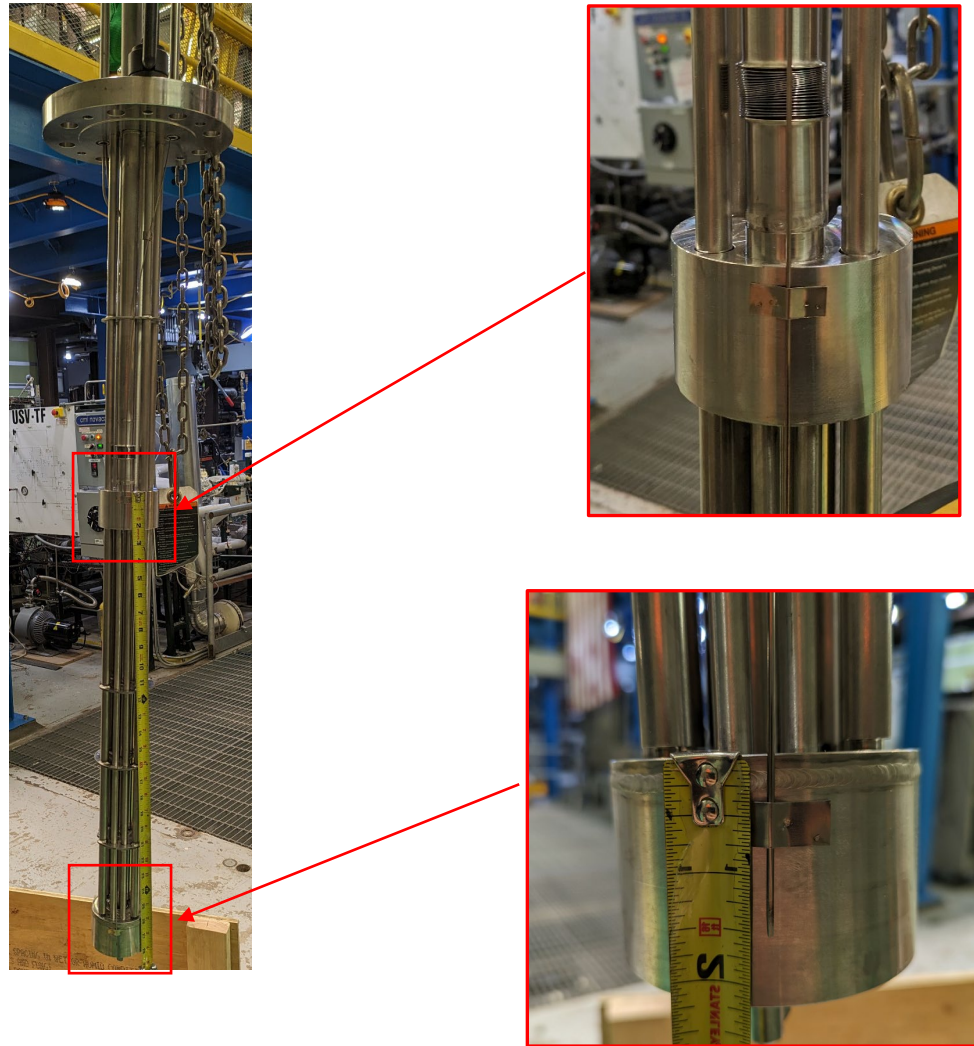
Photos showing the location of tack welds securing a 1/16" outer diameter 316SS capillary tube which will house a distributed optical fiber based temperature sensor.
